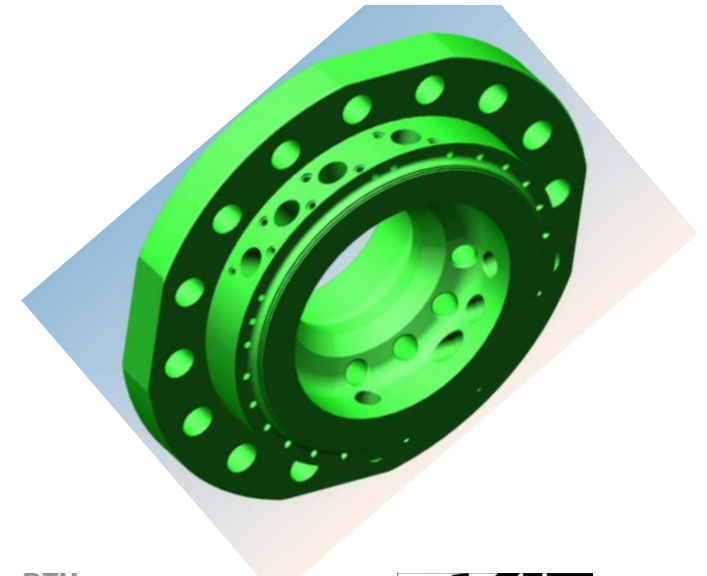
CAD drawing of the optical cover mounted on the engine.
